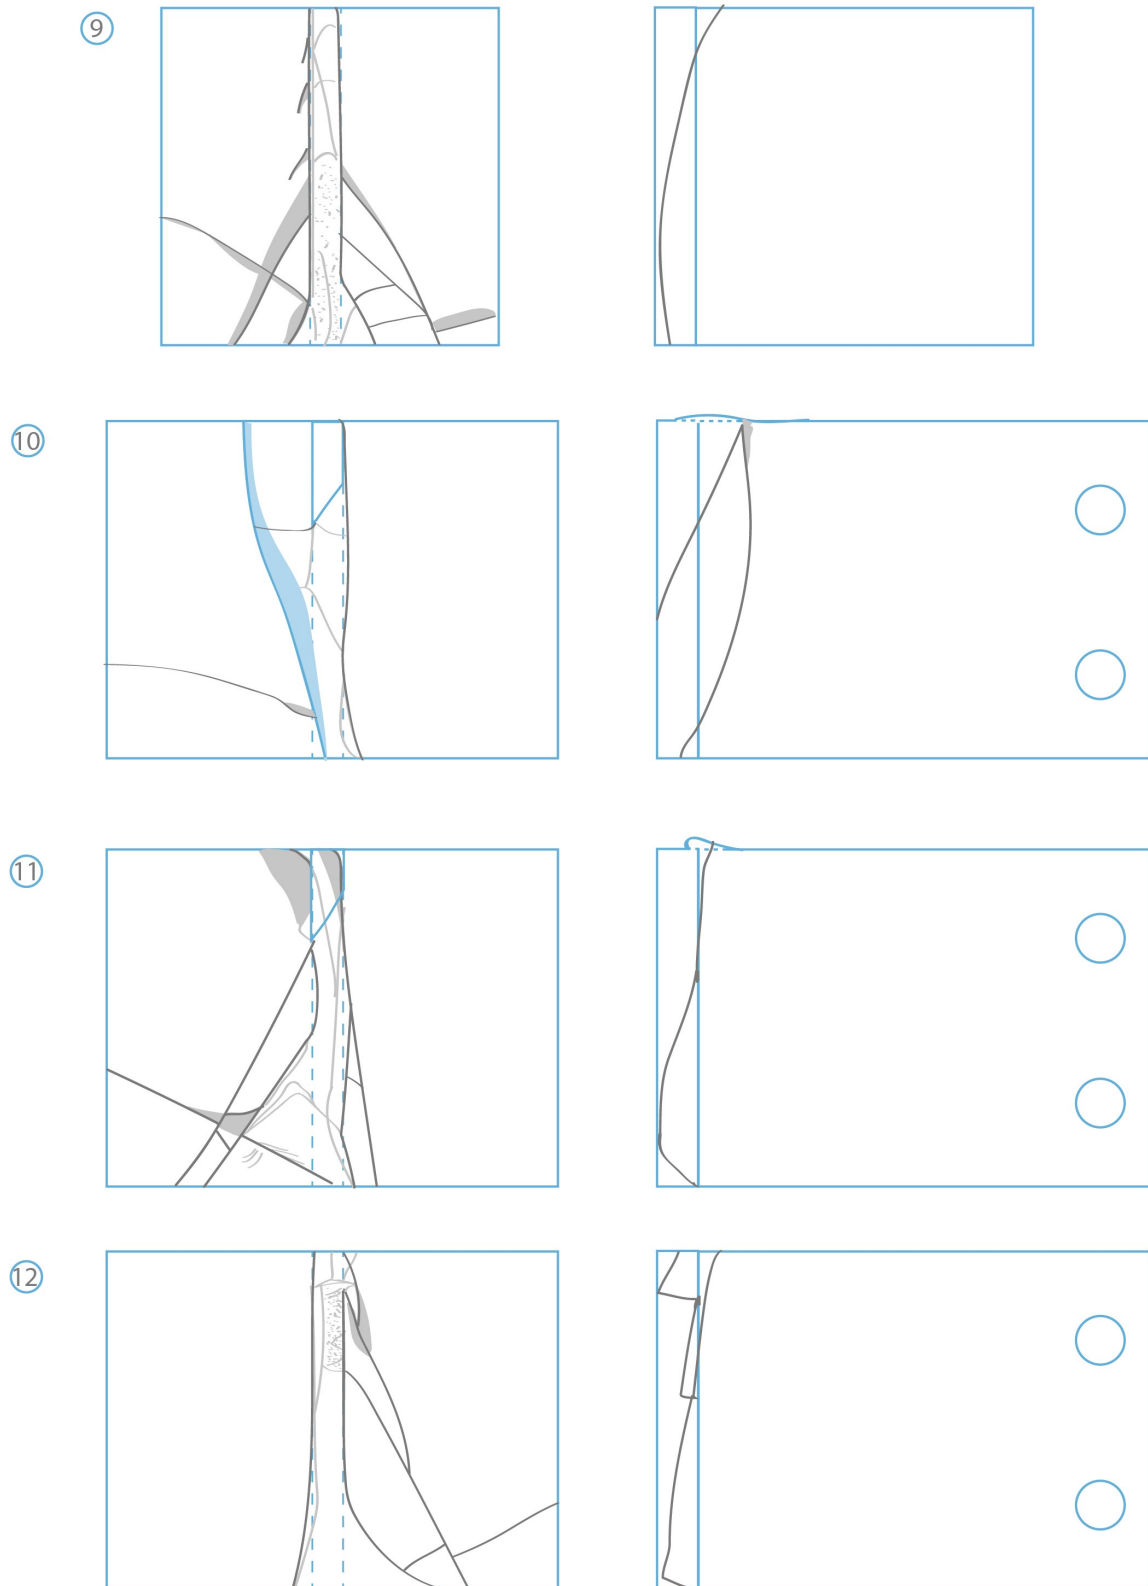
Cracks in specimens 9 (fused) and 10 to 12 (welded) after the shear test. The blue line in specimen 10 is the crack originated during transport.
